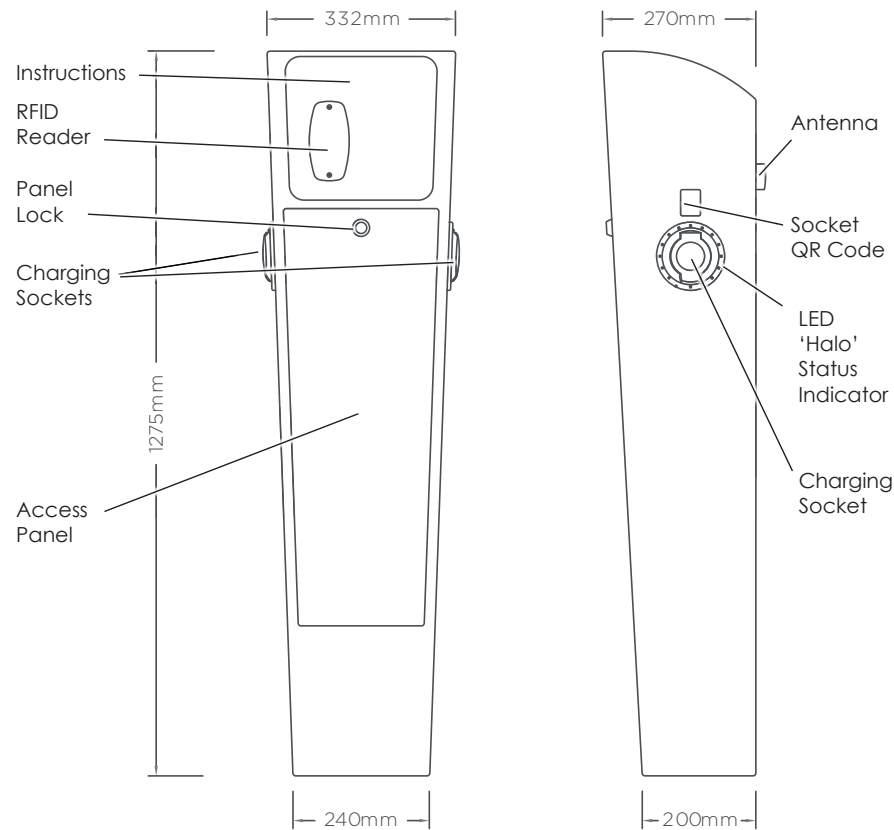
General Arrangement and Dimensions (2 socket model shown)
